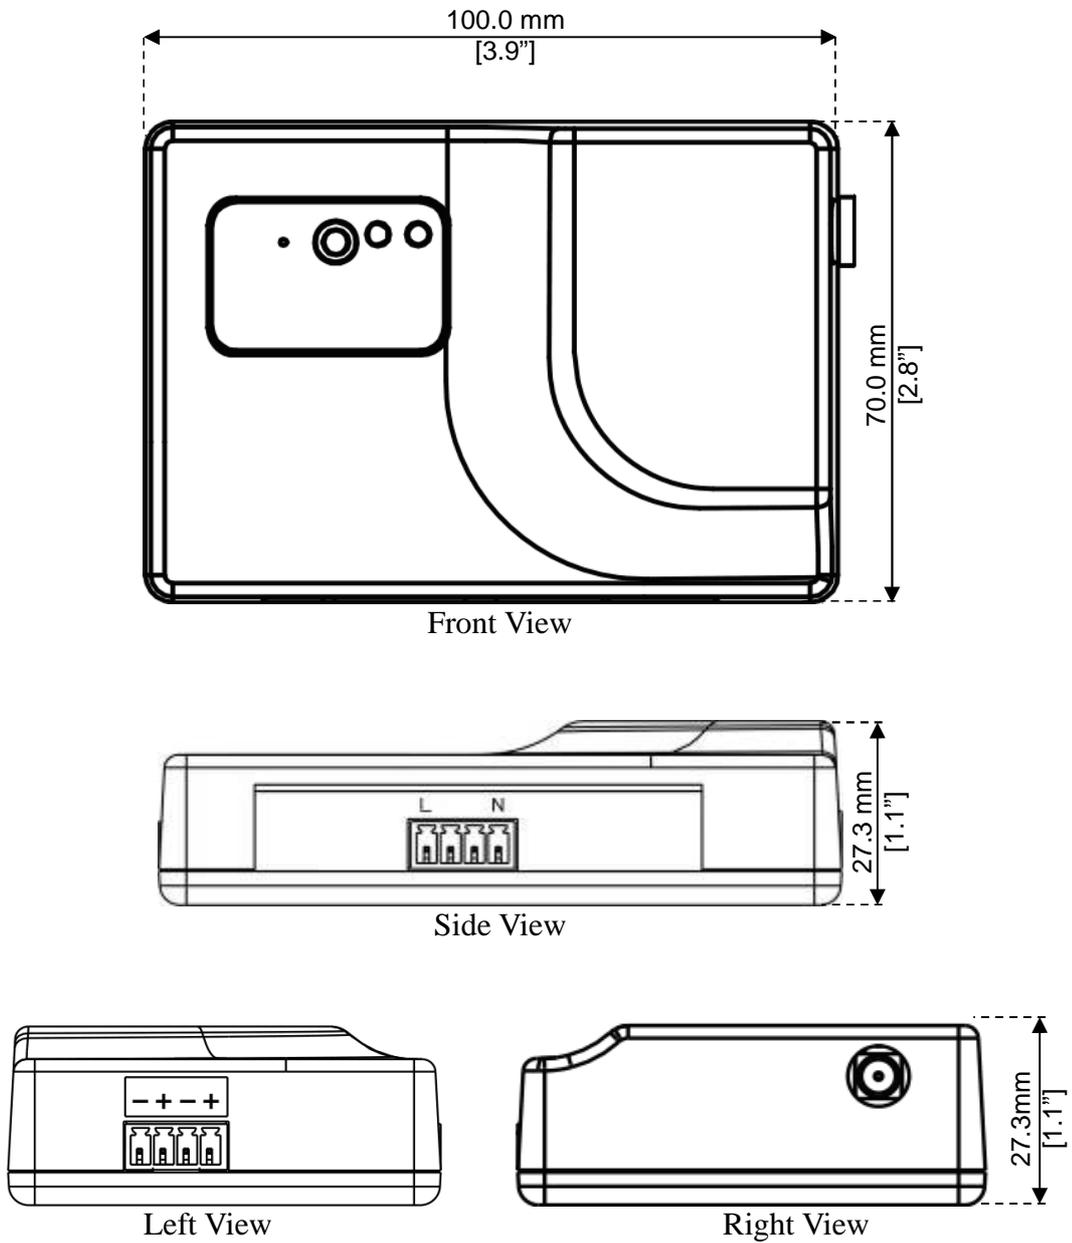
DC Power Supply DPS-048A Dimension Drawings
